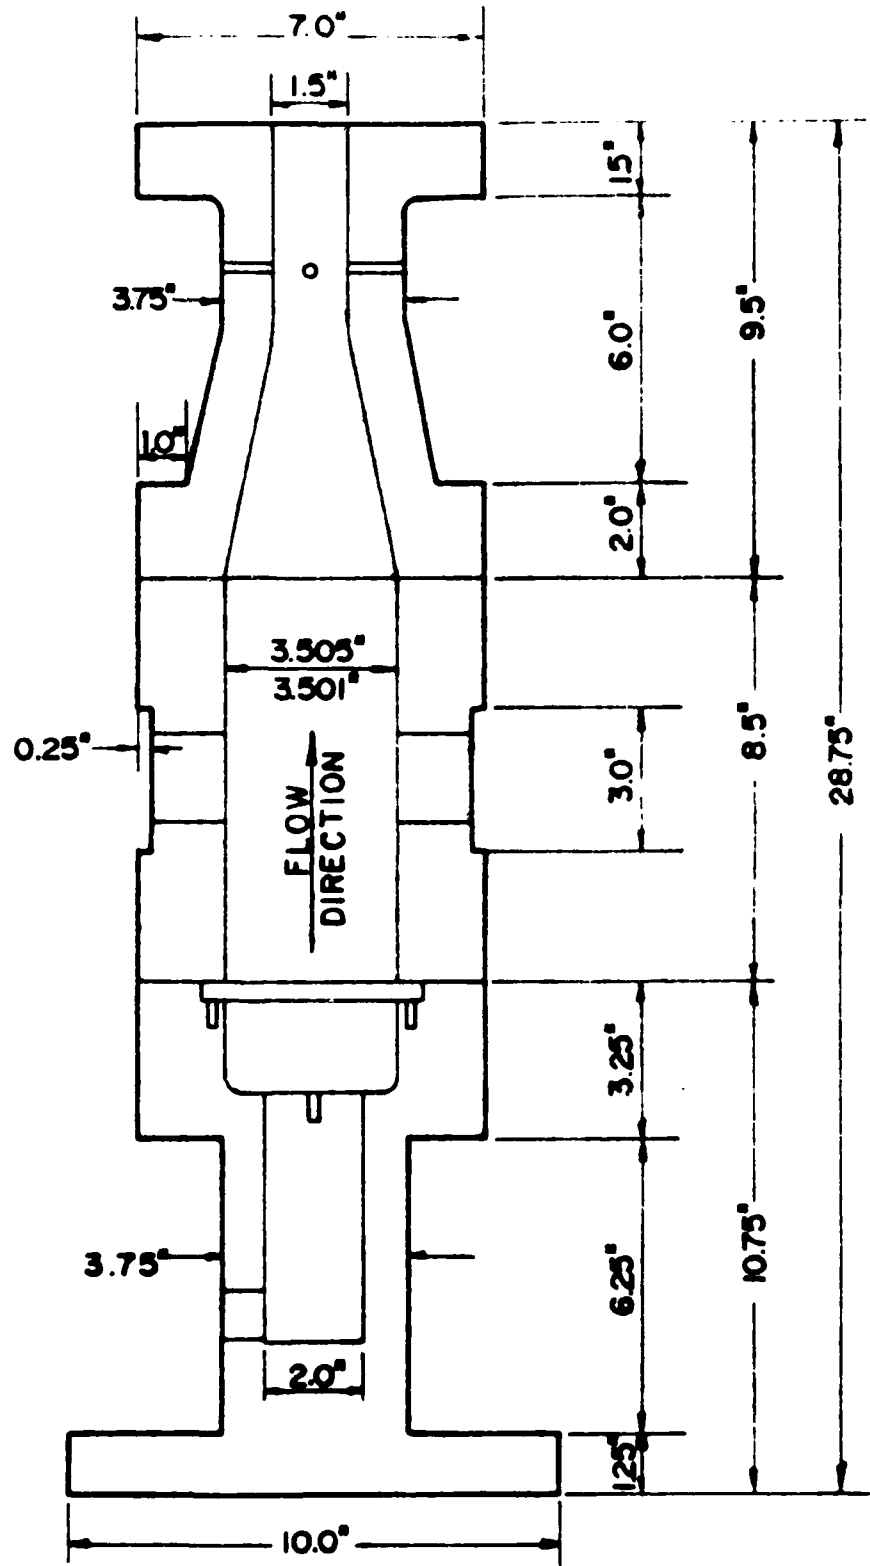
Schematic of Combustion Bomb Showing Principal Dimensions.
